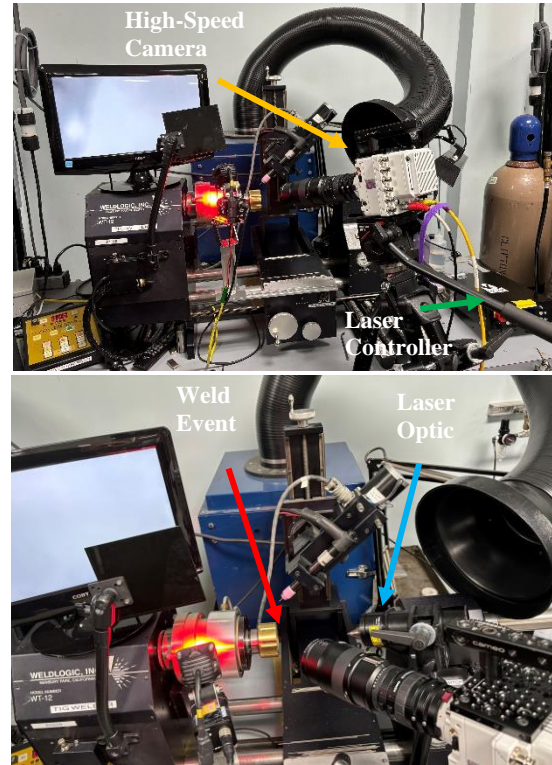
Two photographs showing the experimental setup highlighting the position of the camera, laser optic, and weld event ROI.
